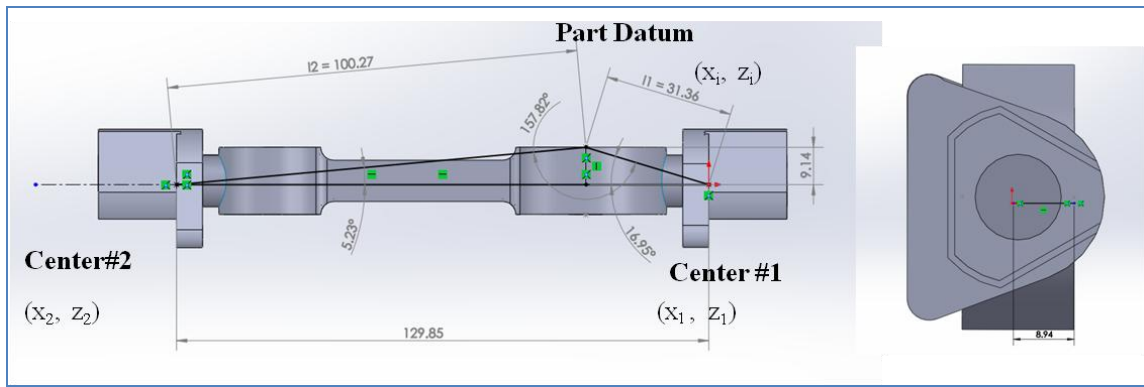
Location of the Datum w.r.to Fixtures
